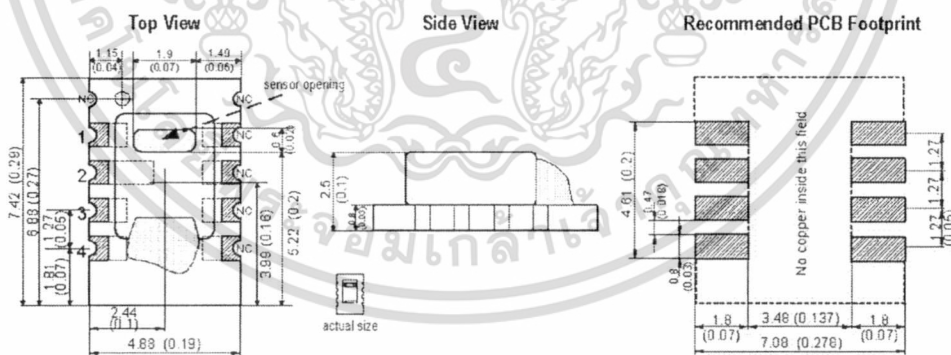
SHT1x drawing and footprint dimensions in mm (inch)
